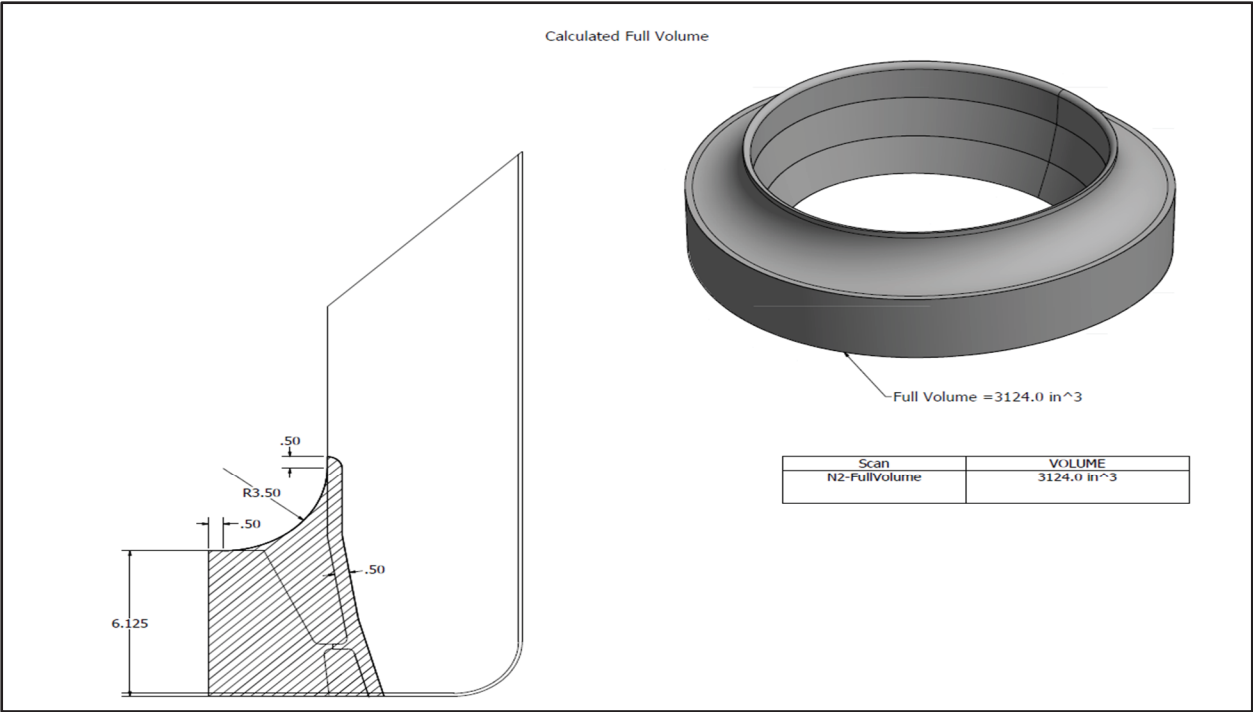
Weld N2H-NV, Full Volume Required Coverage
